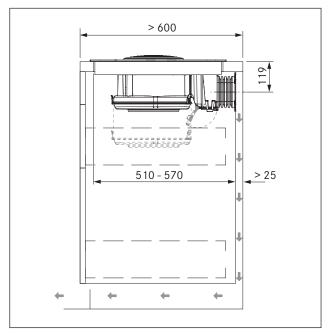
Installation dimensions for recirculated air, worktop depth 600 mm
